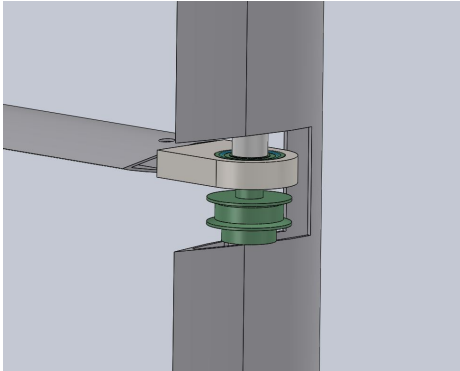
Blade to bottom strut connection with airfoil cutout and geared pulley for pitch system actuator
